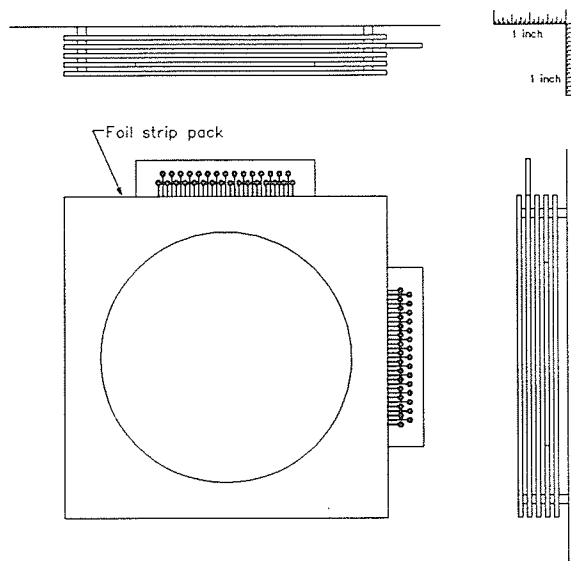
Schematic of the mounting of the foil strip assembly.
